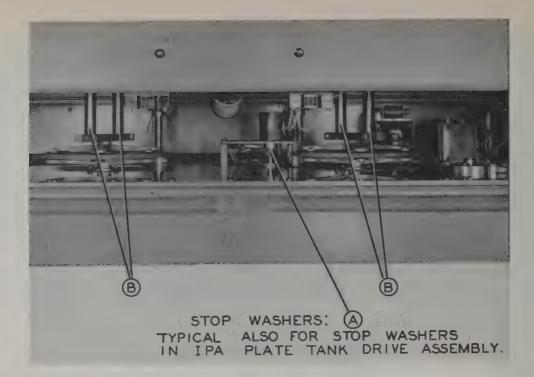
Lubrication of PA Plate Tank Drive Assembly and Shorting Bar Guides.
